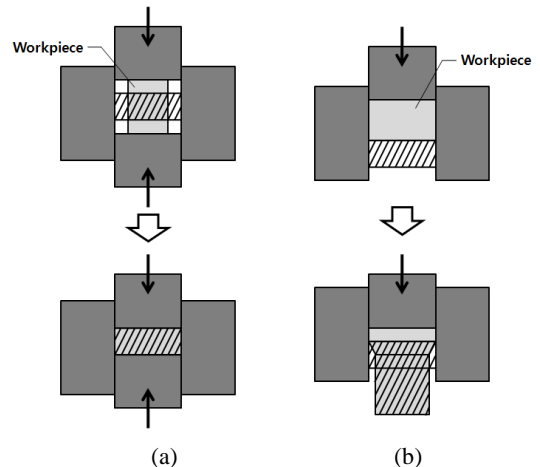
The typical forging process for gear: (a) closed-die forging and (b) forward extrusion process
